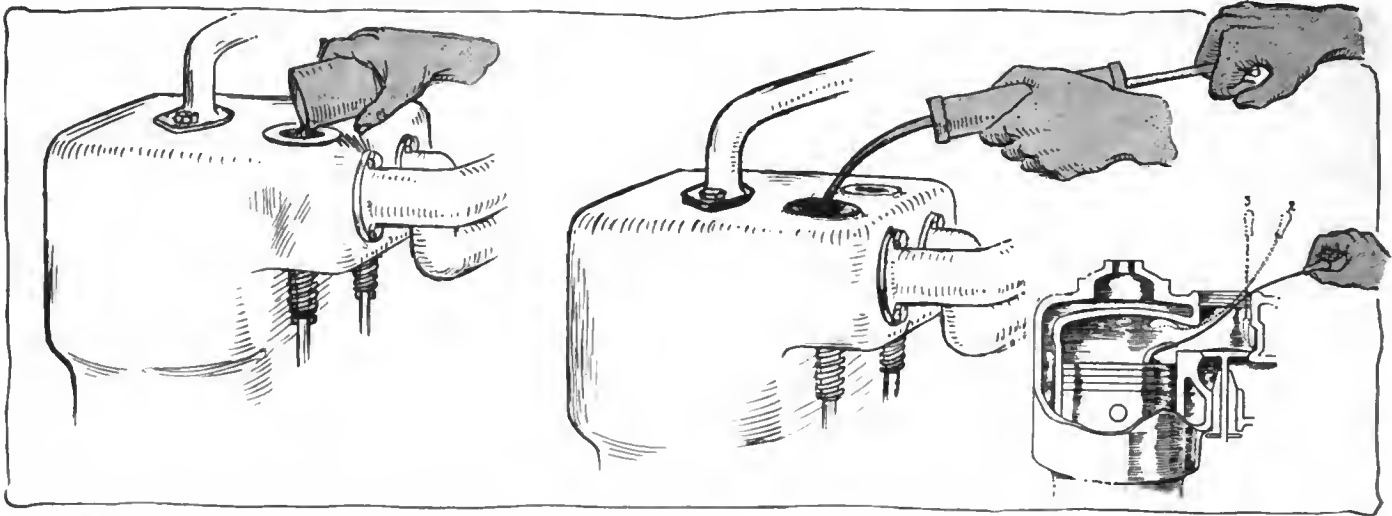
Showing the steps in the application of a liquid carbon remover to the cylinders. Left, pouring in the remover; center, drawing it out by means of an oil gun; right, using the scraper
